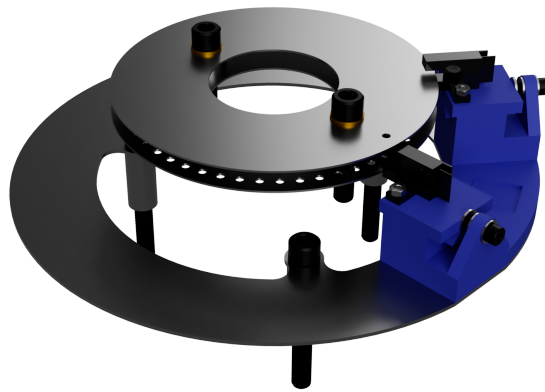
The spindle encoder was designed to be adjustable and use existing mounting points on both the 1940s era milling machine and recent modifications for FSW use.
